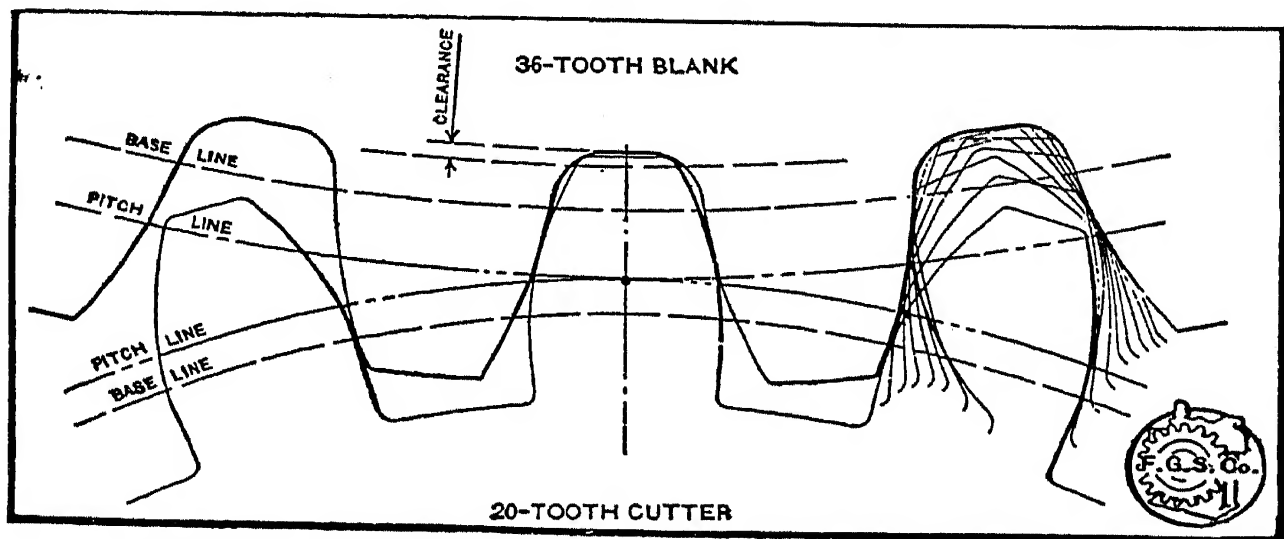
The generating action of a rotary gear shaper cutter.
